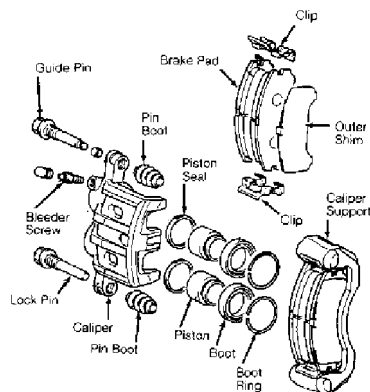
Exploded View Of Front Disc Brake Caliper (Typical Dual Piston)
